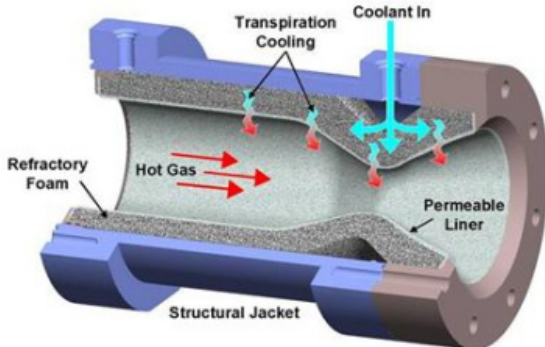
Ceramic Form Cores and Transpiration Cooling Chamber[11,12]
